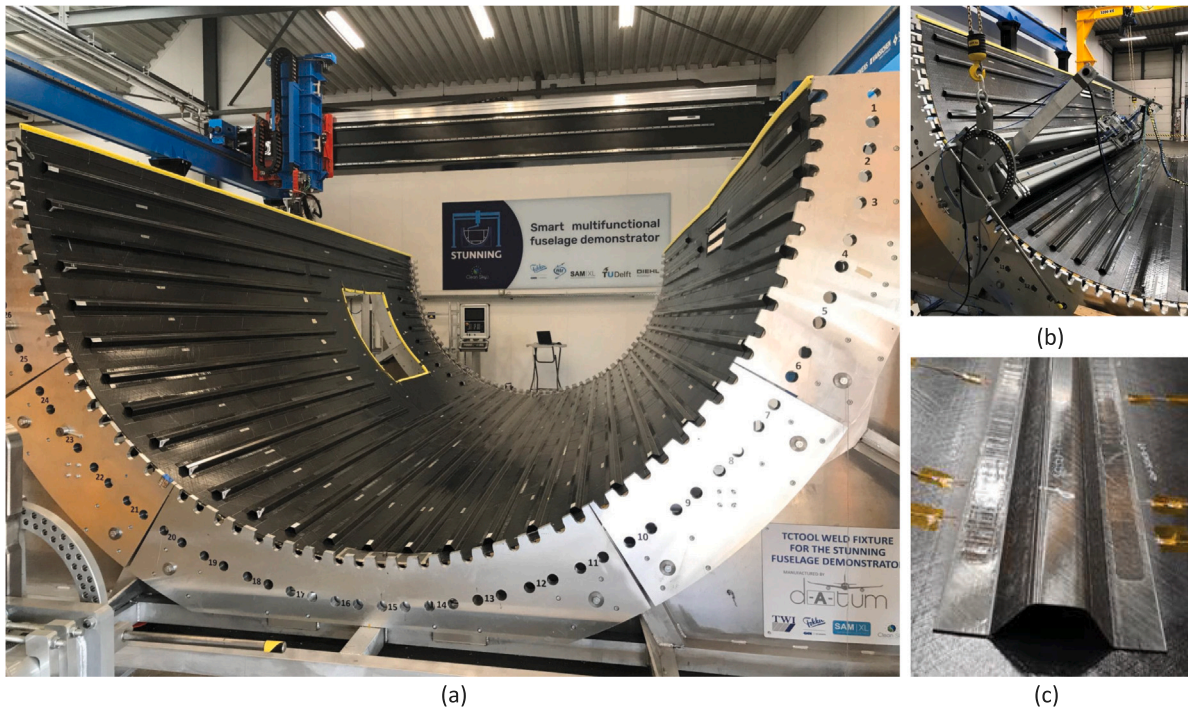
Multi-Functional Fuselage Demonstrator: (a) omega stiffened skin structure; (b) welding tooling; (c) close-up welded omega stiffener.
